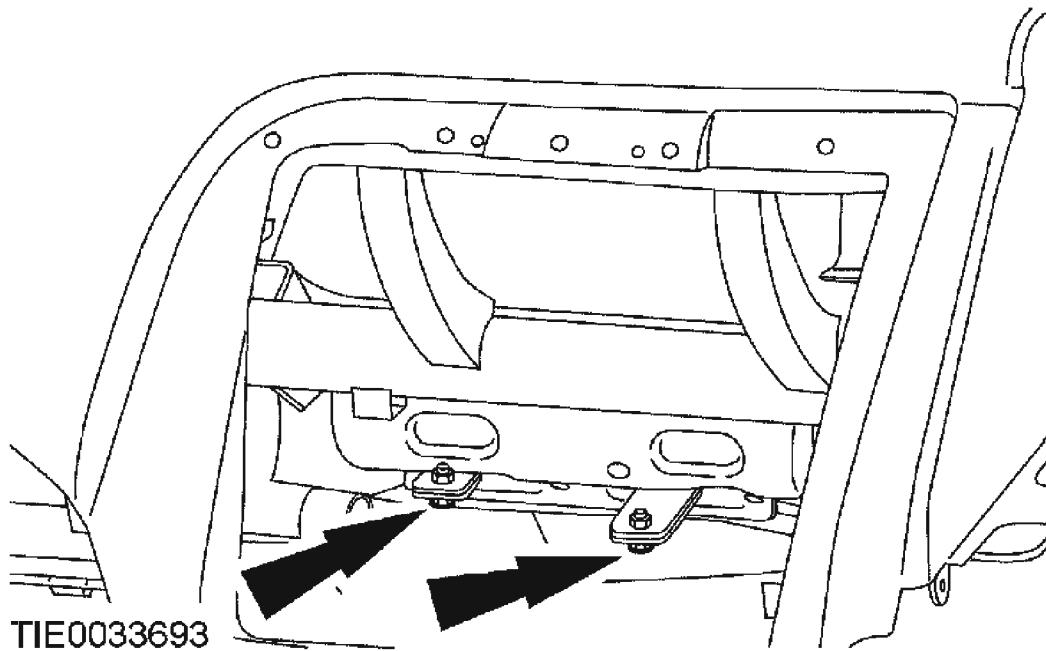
Removing Passenger Air Bag Module Trim Cover Retaining Bolts
